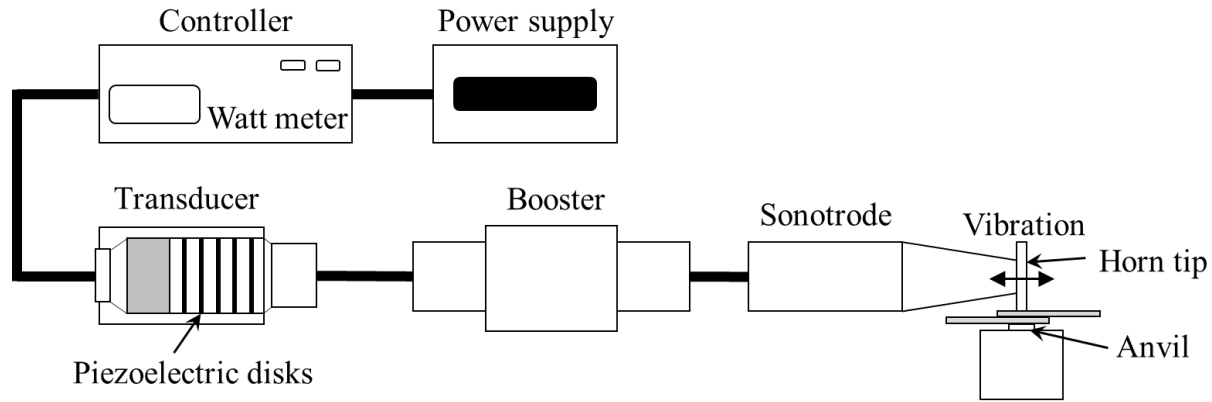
Schematic of a metal ultrasonic welding machine.
